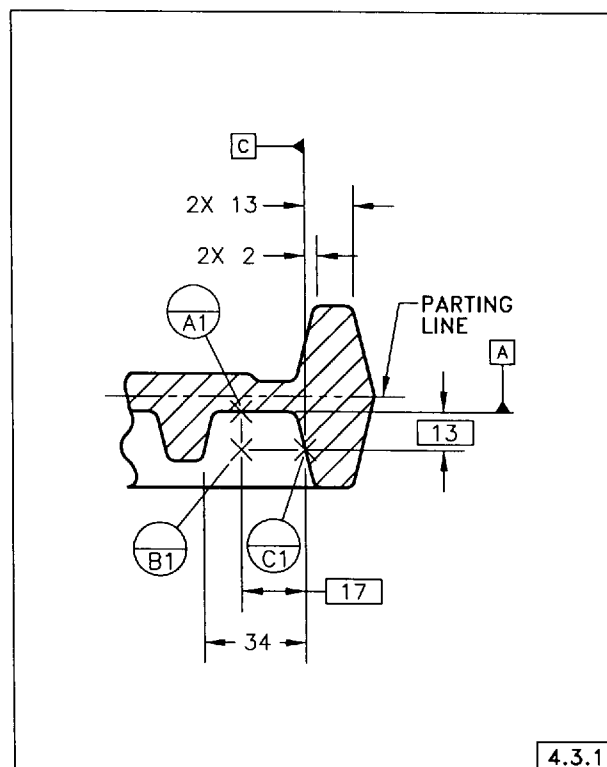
DATUM TARGETS WITHIN SAME DIE SEGMENT
